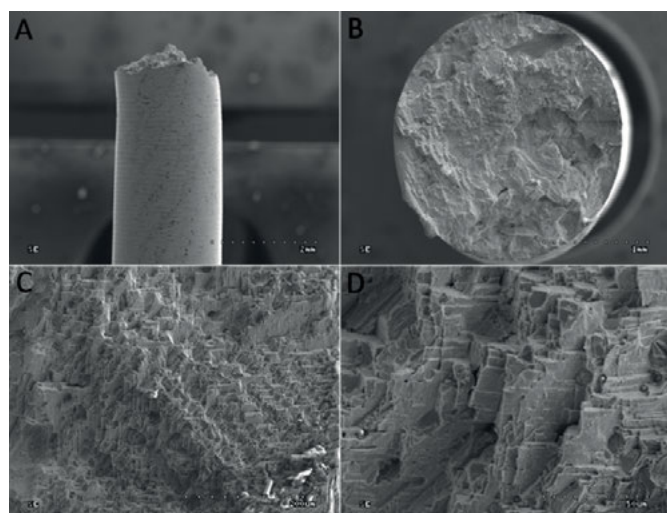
Microscopic images of fractures of laser-welded samples. A - General view of the sample, B - General view of the fracture, C - The fracture area in the dendrite zone, D - Magnified fracture in the brittle fracture zone
